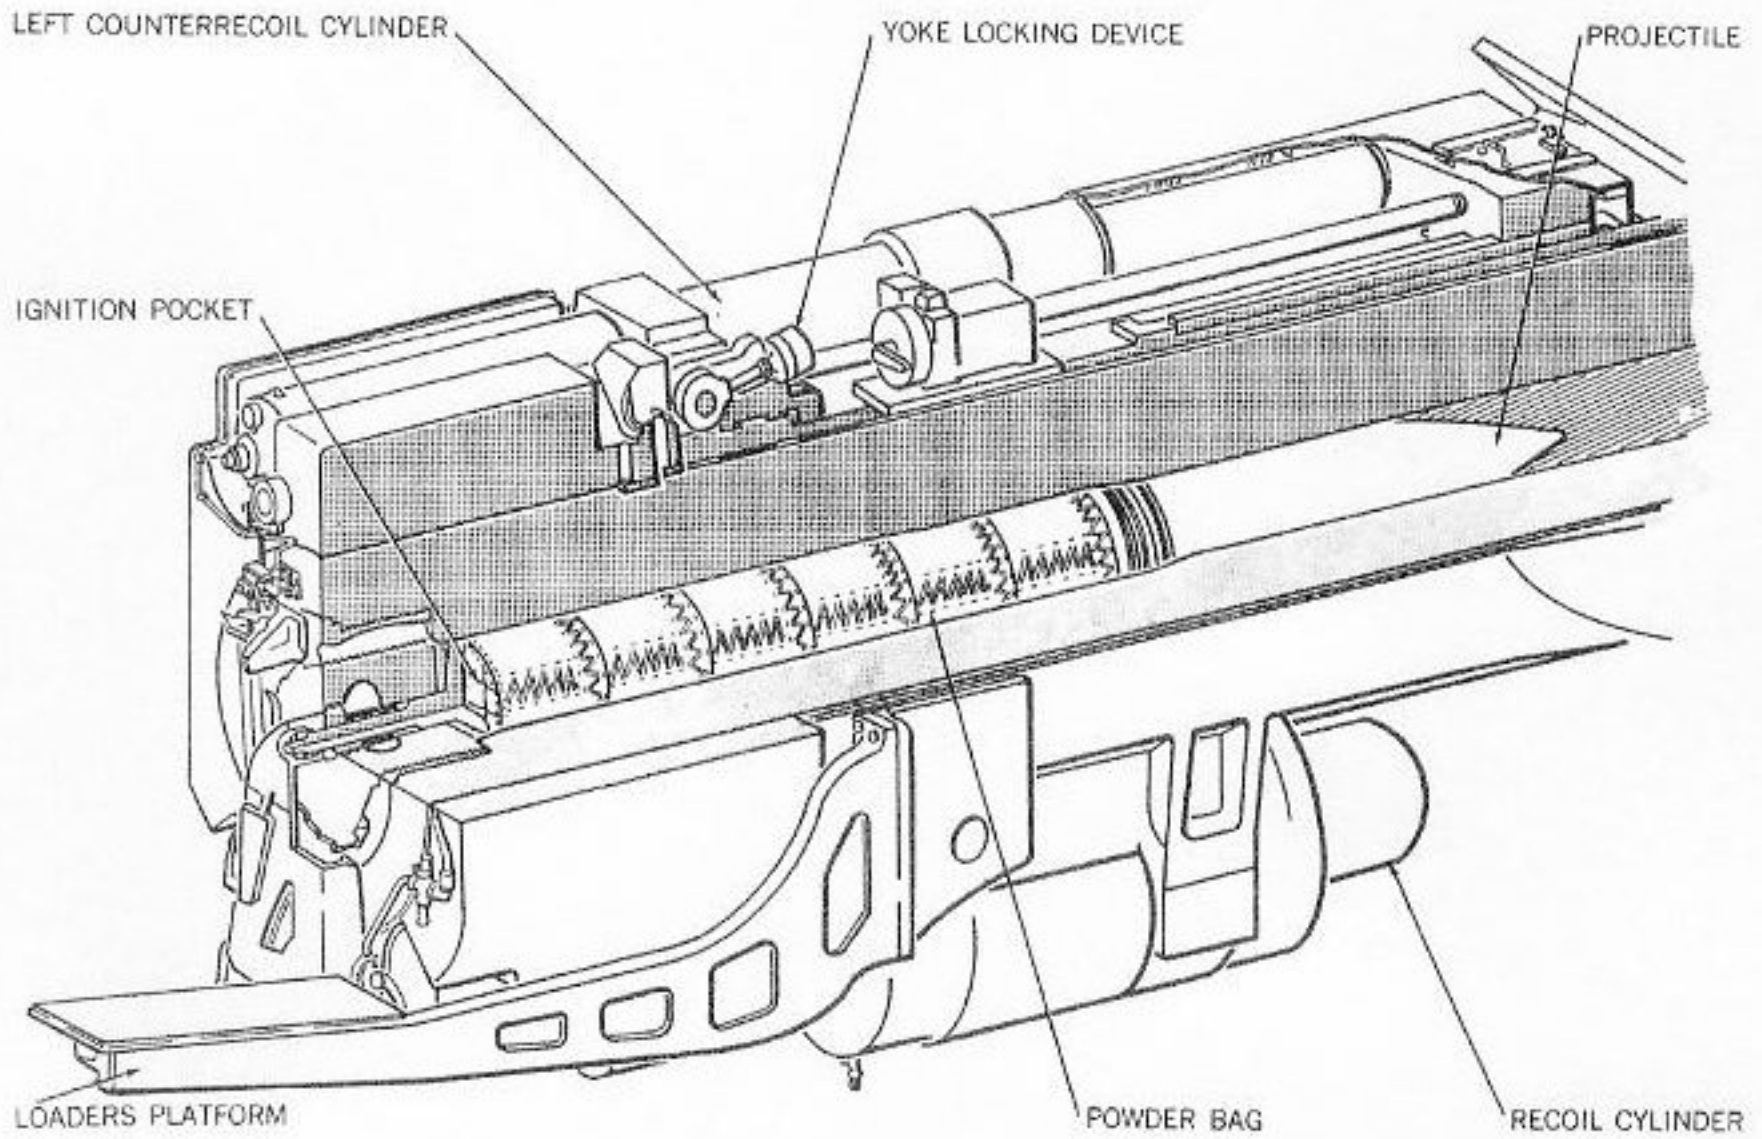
16-inch Gun Assemblies. Gun Ready for Firing.
